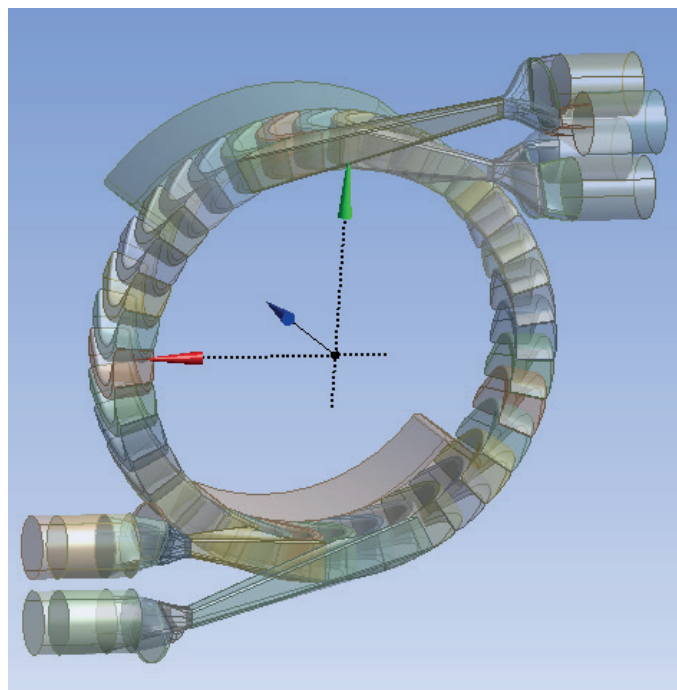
Geometric model of an engine with disc valves and split nozzle
